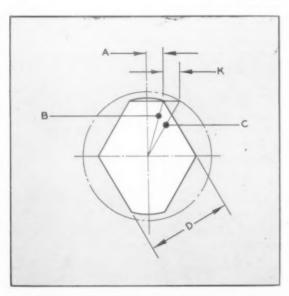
Part center distance tolerances and tool center distance tolerances are shown here.
